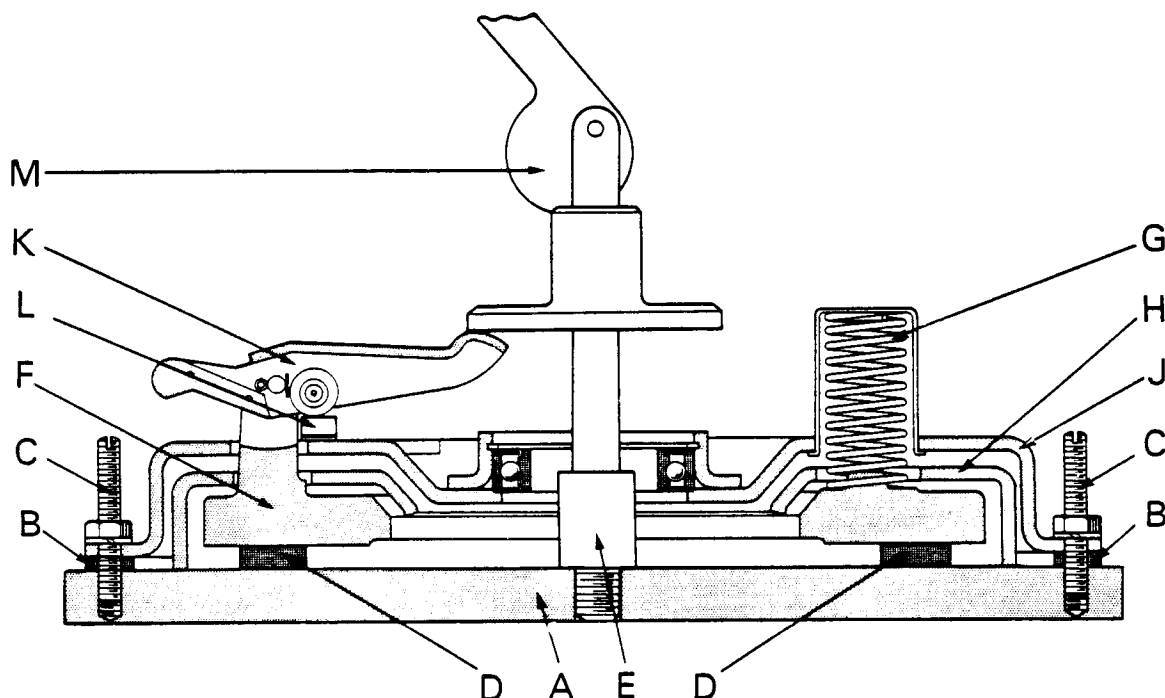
ASSEMBLING A DOUBLE CLUTCH
